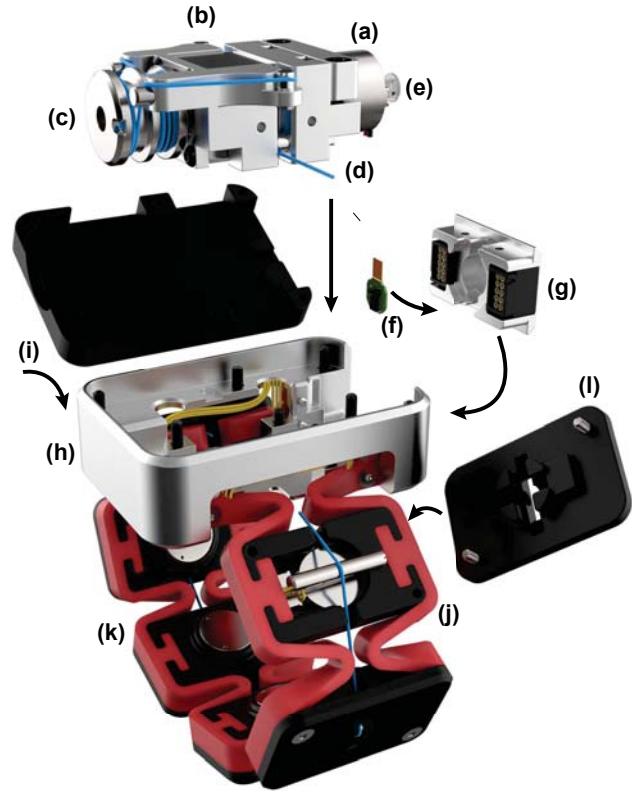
Exploded view of Tasbi (color added for clarity). The squeeze mechanism consists of a 12 mm DC motor (a) and a 13 mm Harmonic Drive gearbox (b) which drives a two-sided spool (c) to create tension in a UHMWP cord (d). Control feedback is provided through an optical encoder consisting of a reflective code wheel (e) and optoelectronic sensor (f). The sensor is epoxied into the rear housing panel (g) which also contains two 10-pin connectors for all electronics. The drive assembly (a-e) drops into the main housing (h) and is secured in place with a housing lid (i). Each vibrotactor unit (j) contains a 10 mm LRA vibrotactor and a smooth stainless steel pin to convert cord tension into normal force. Vibrotactor units are clipped into elastic sidings (k) and secured with lids (l).
